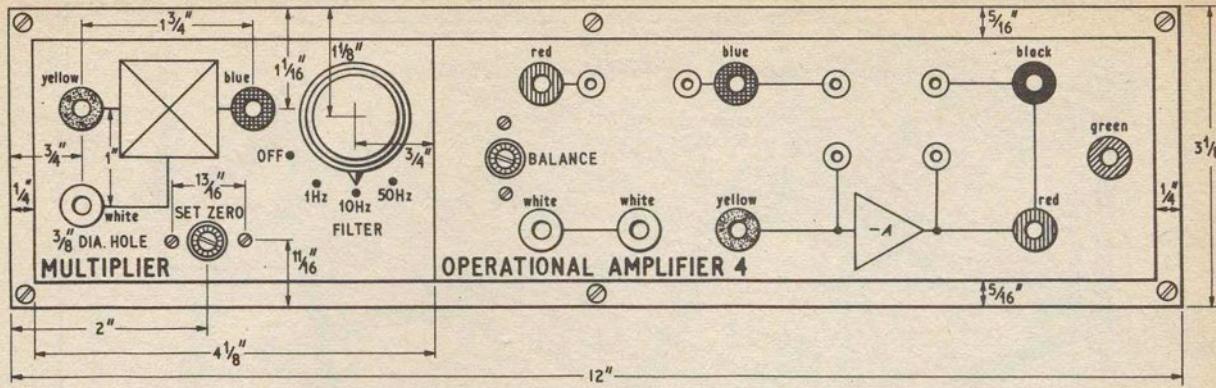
Dimensions and engraving details for UNIT “D” front panel
